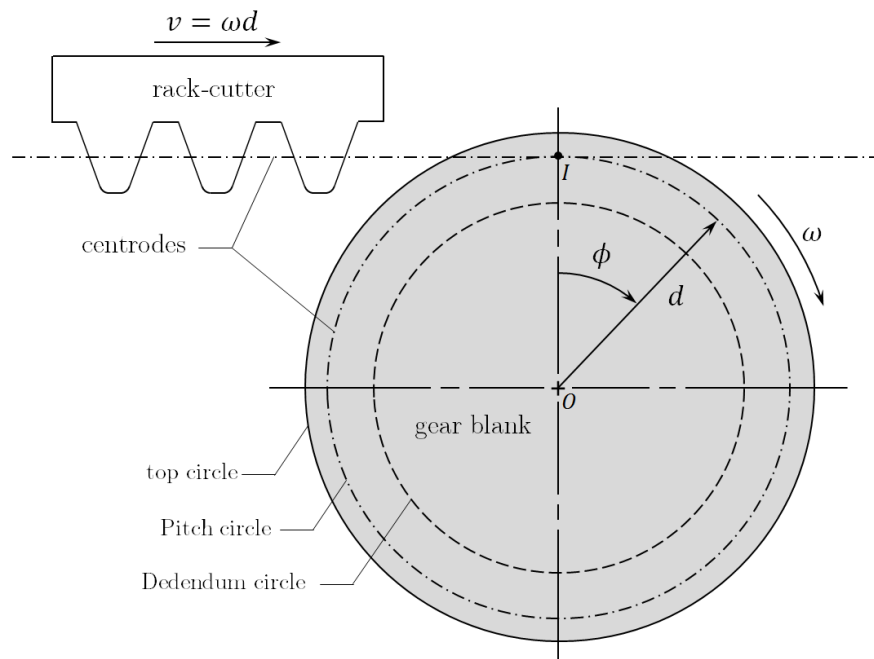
Manufacturing of an external involute gear using a rack cutter
